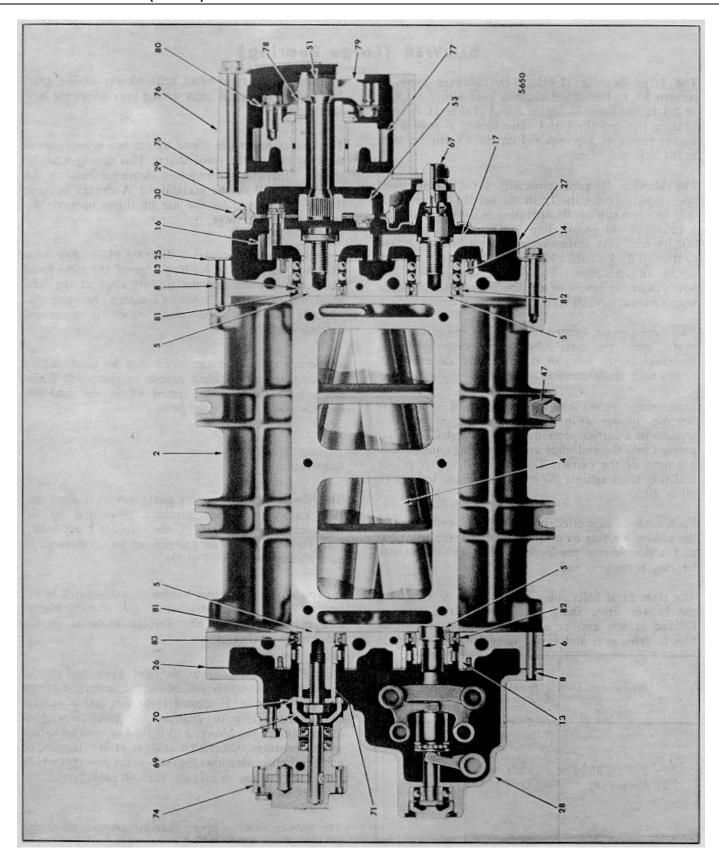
Blower and Drive Assembly and Accessories Attached to Blower
